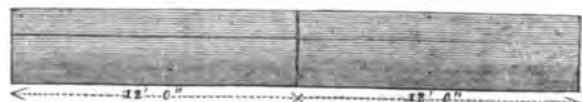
Midship Sections, stowed on Booms, to be used as store-rooms, or water-tanks, on the voyage, containing upwards of 3000 gallons.
